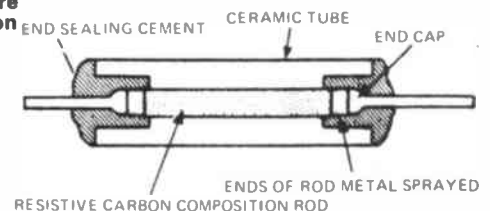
(b). Assembly of a ceramic tube type insulated carbon composition resistance.
